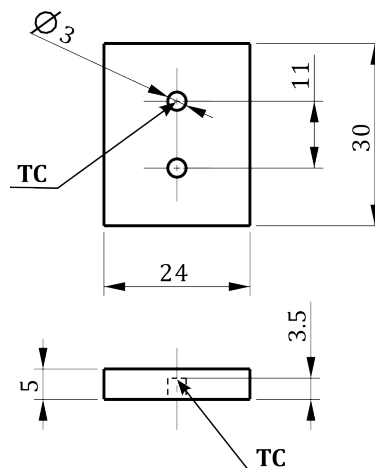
Dimensions of the measuring plate (TC - thermocouple welding point)
